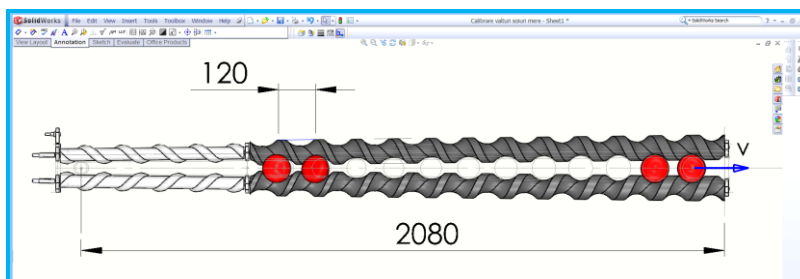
Scheme of sorting parts of spiral rolls type with profiling surface
